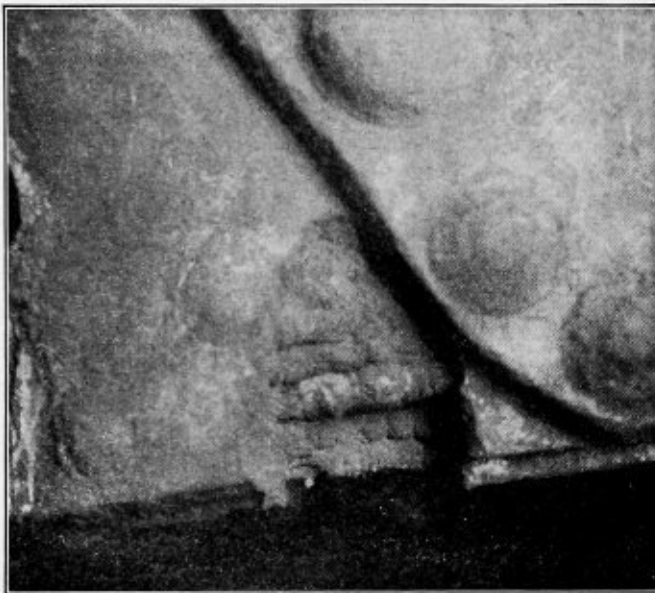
MUD RING PARTIALLY WELDED AFTER BEING DRILLED AND CHIPPED OUT
